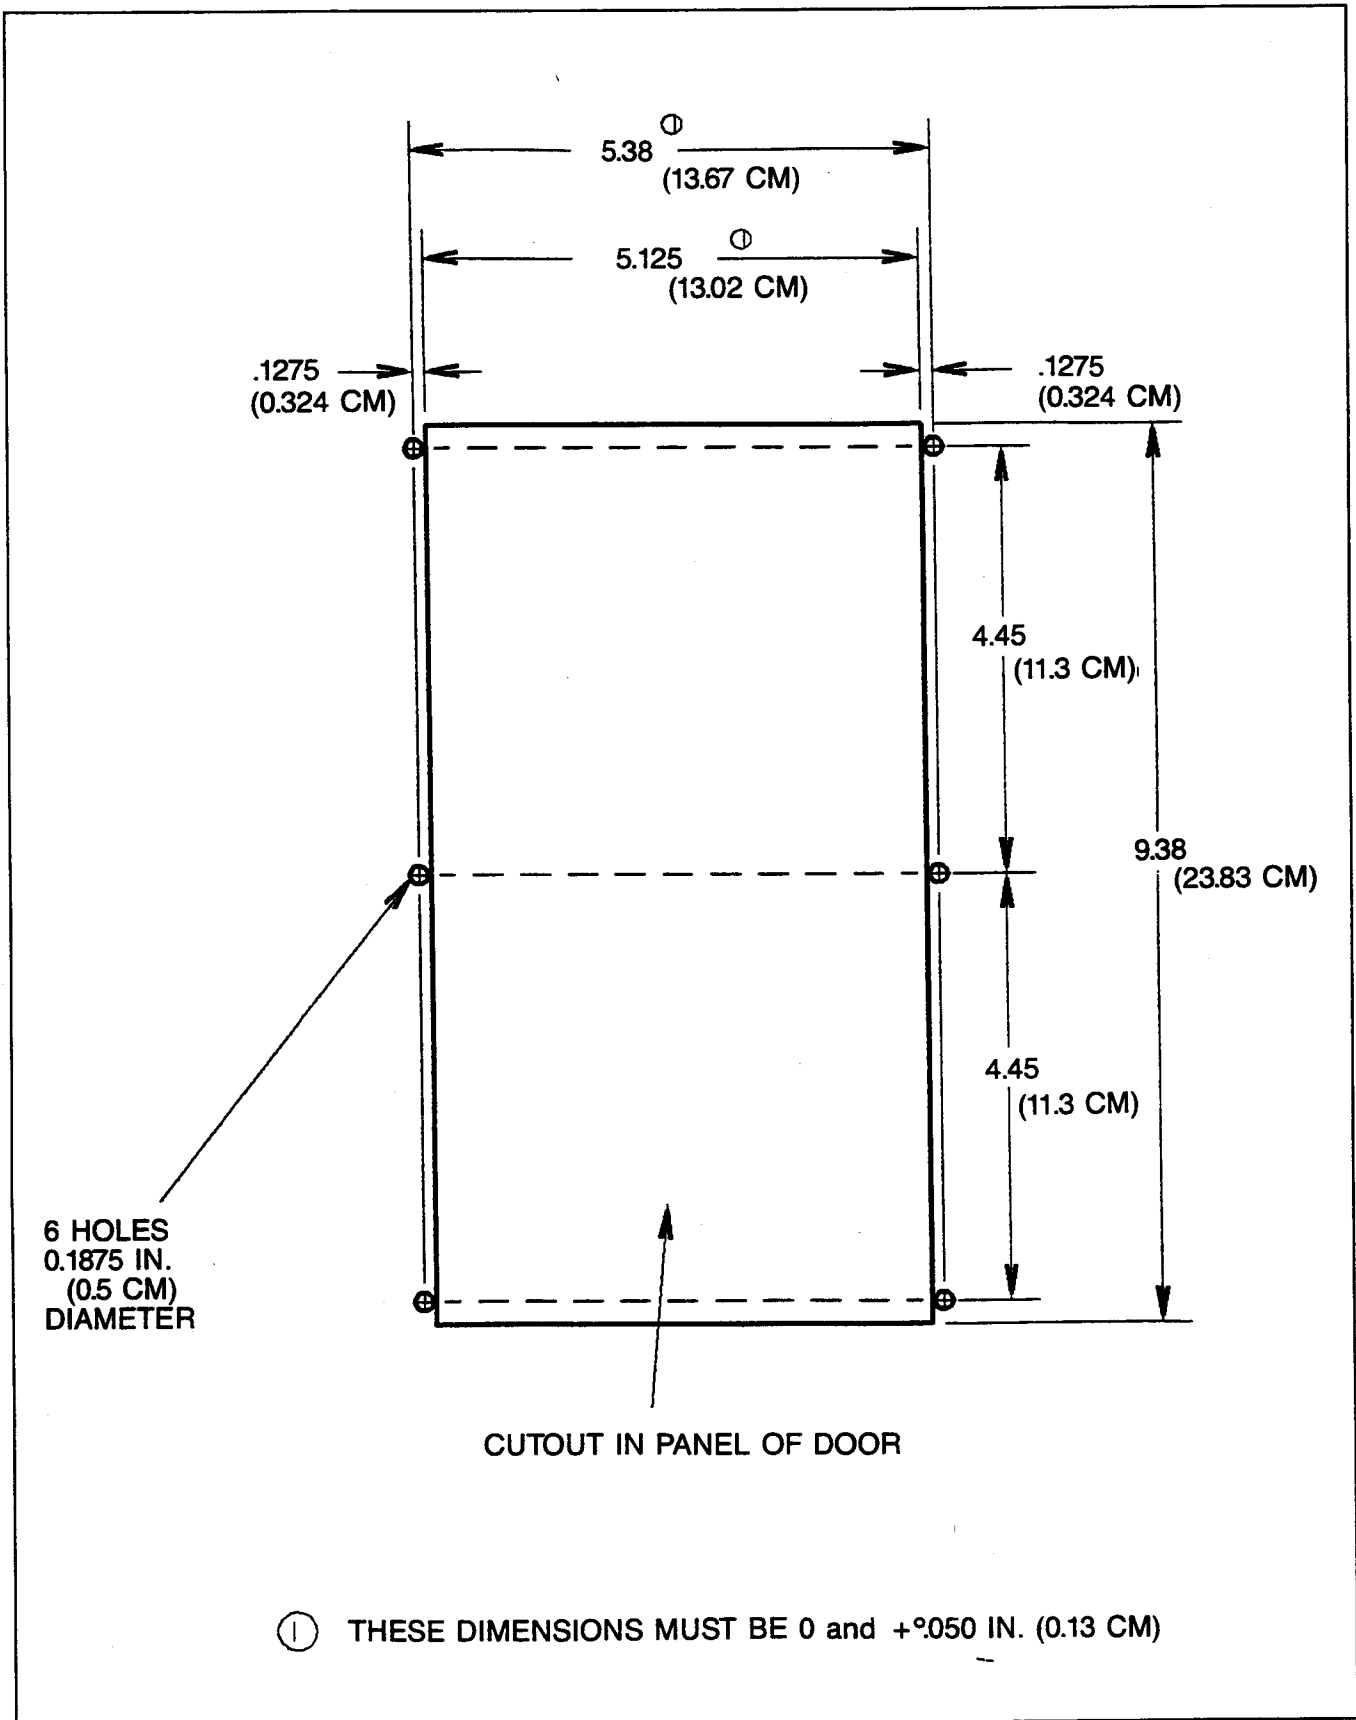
IQ-1000 Chassis Cutout Dimensions
